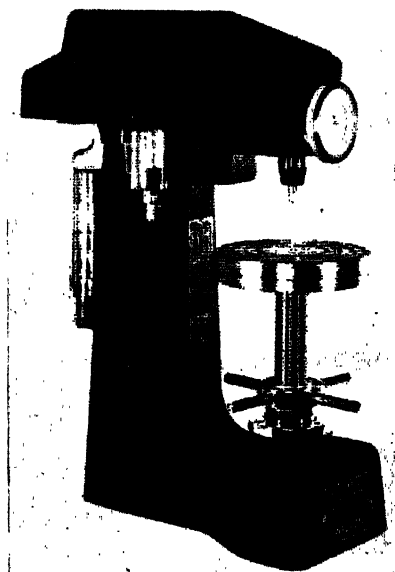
ROCKWELL HARDNESS TESTER (*George H. Alexander Machinery, Ltd.*)
